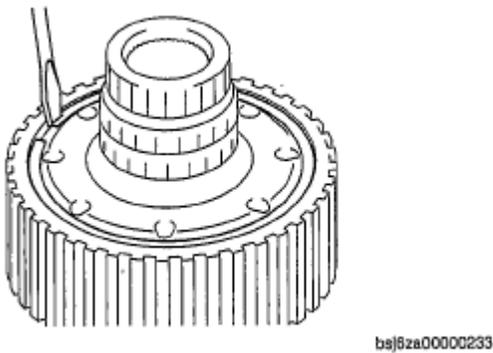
Removing Snap Ring From Rear Planetary Ring Gear Using Flathead Screwdriver
